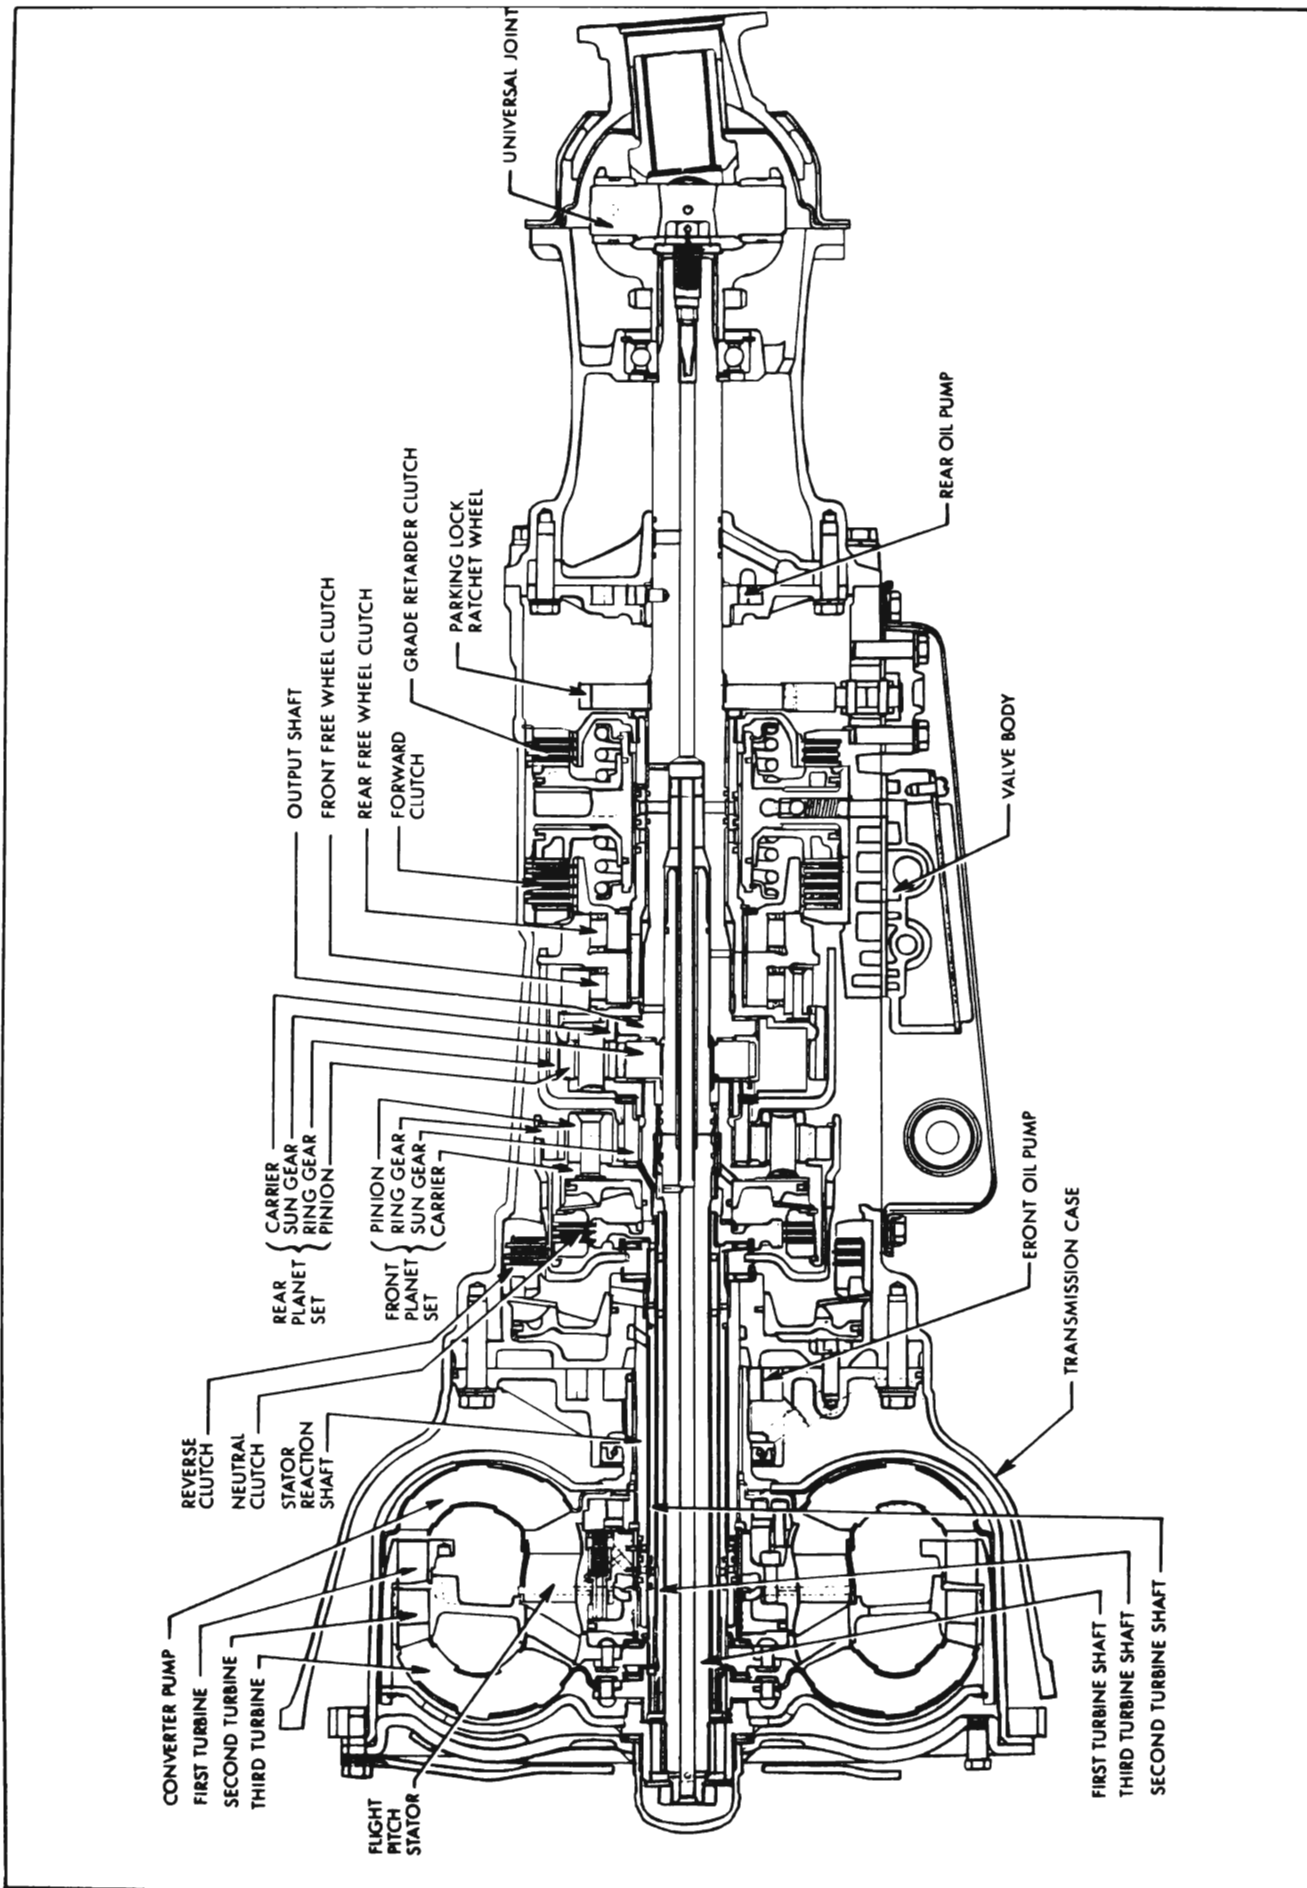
Side Sectional View of Flight Pitch Dynaflow Transmission
